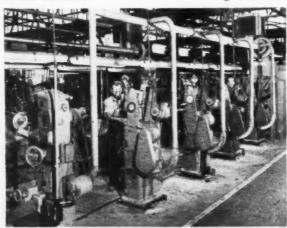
Tooth grinding of segment saws is exhausted by four dry-type units.
